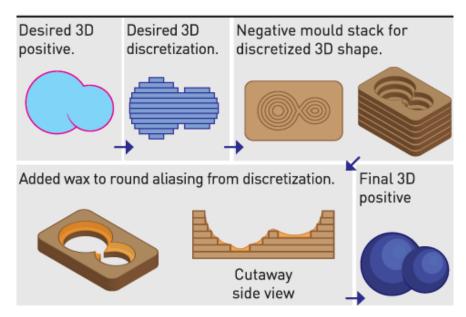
The Silicone I/O molding process. First, the designer discretizes the desired 3D model into flat sheets, which they parametrically design and laser-cut. They then reassemble the flat sheets in the correct order, sealing and smoothing the mold with molten wax. The casting material can then be poured in and cured.
